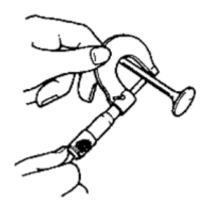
Checking Valve Stem Outside Diameter Courtesy of SUZUKI OF AMERICA CORP.
